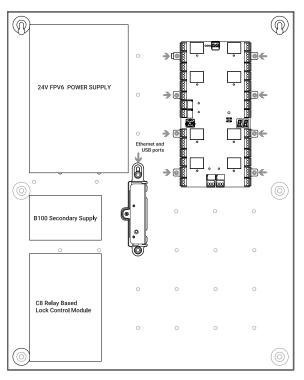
Access Control Core mounted with bracket (Ethernet and USB ports facing up) below 8-Port Board
